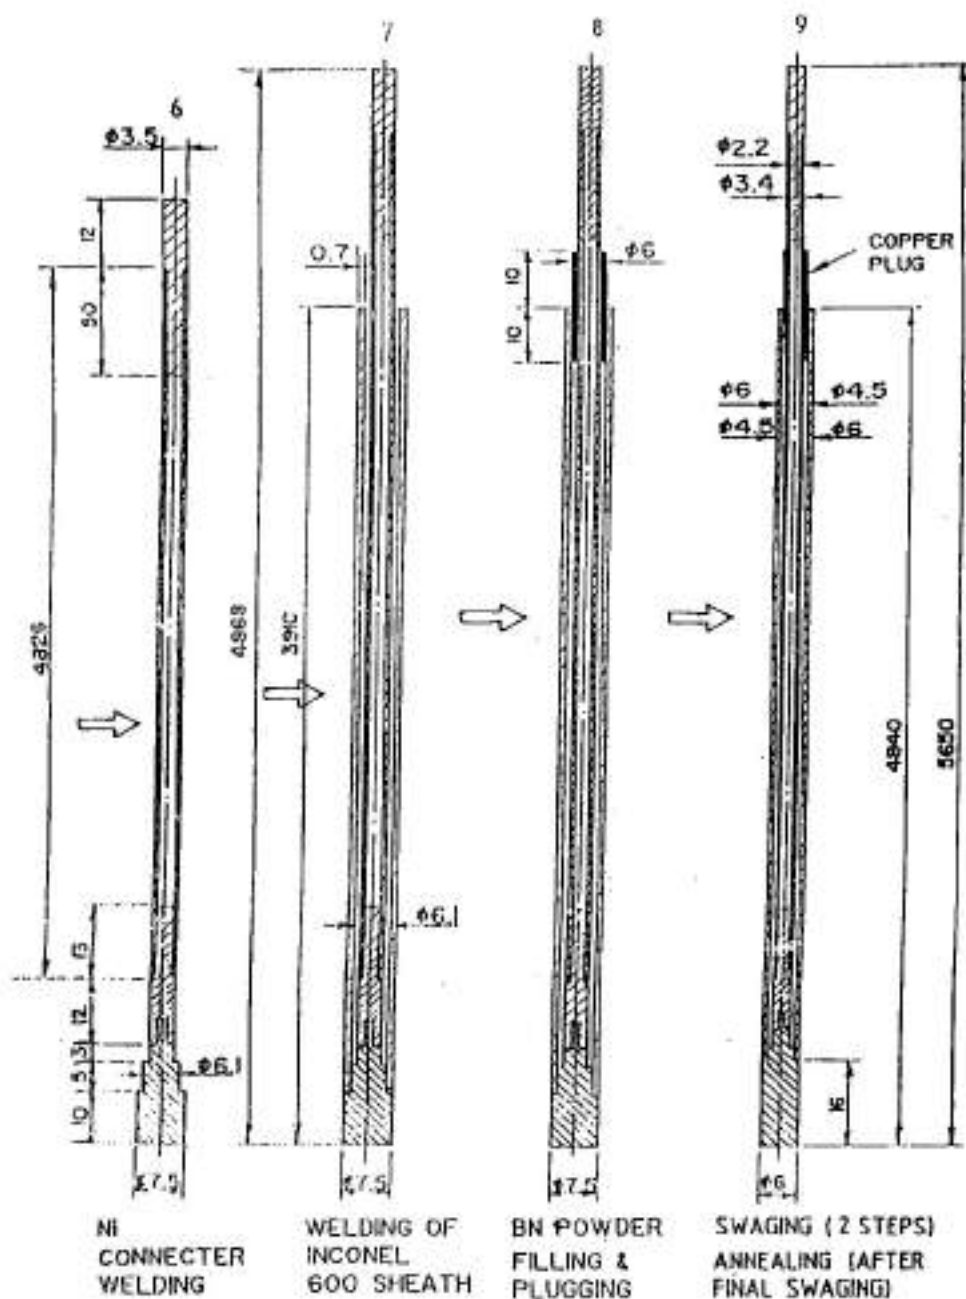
FABRIATION SEQUENCE OF HEATER ASSEMBLY
